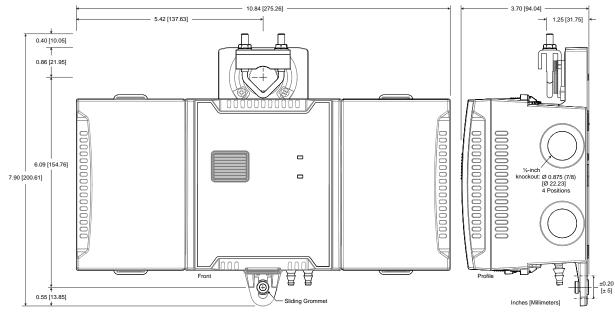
ECB-VAV Controller with Terminal Covers Dimensions
